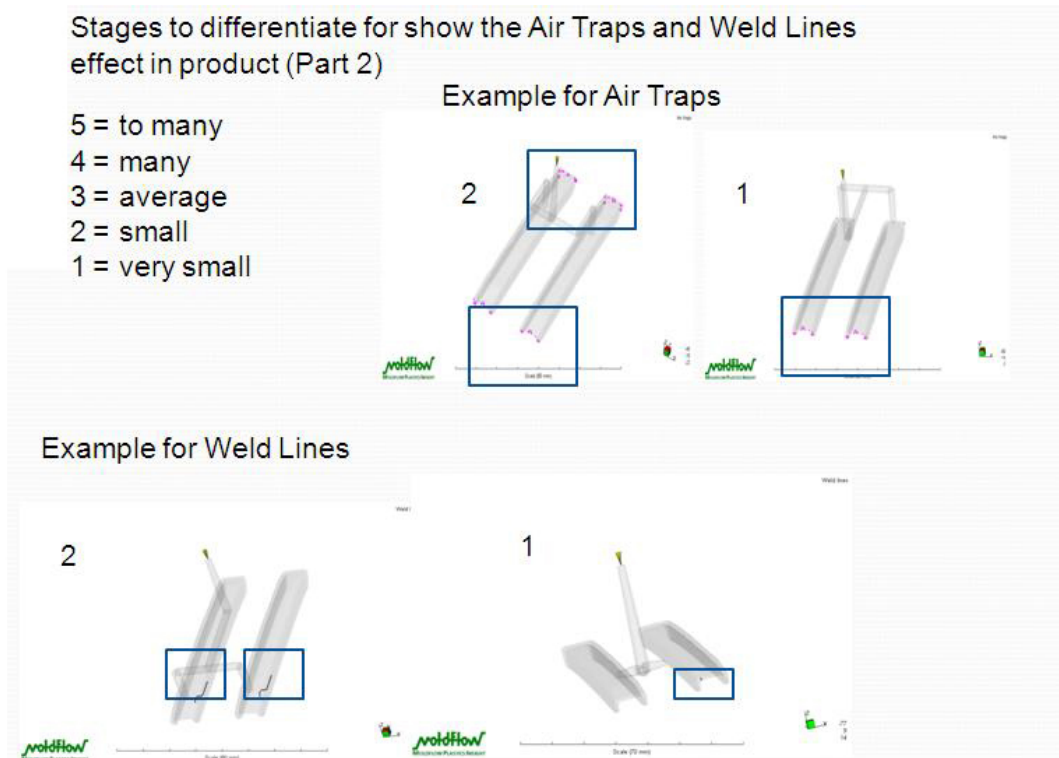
Air Traps and Weld Lines Stage for Part 2
